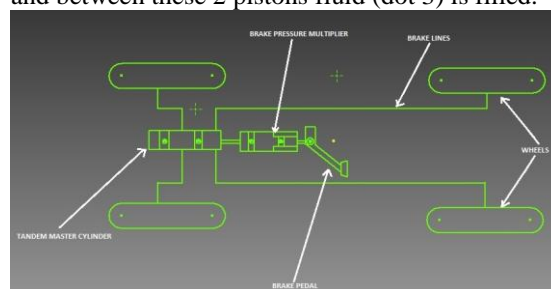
Brake hydraulic circuit along with brake pedal & brake pressure multiplier.
